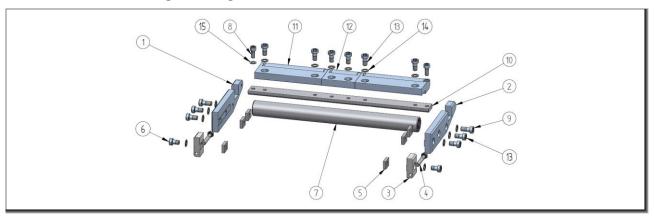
Parts list: Rolling knife edge Ø16– U.910.0030
